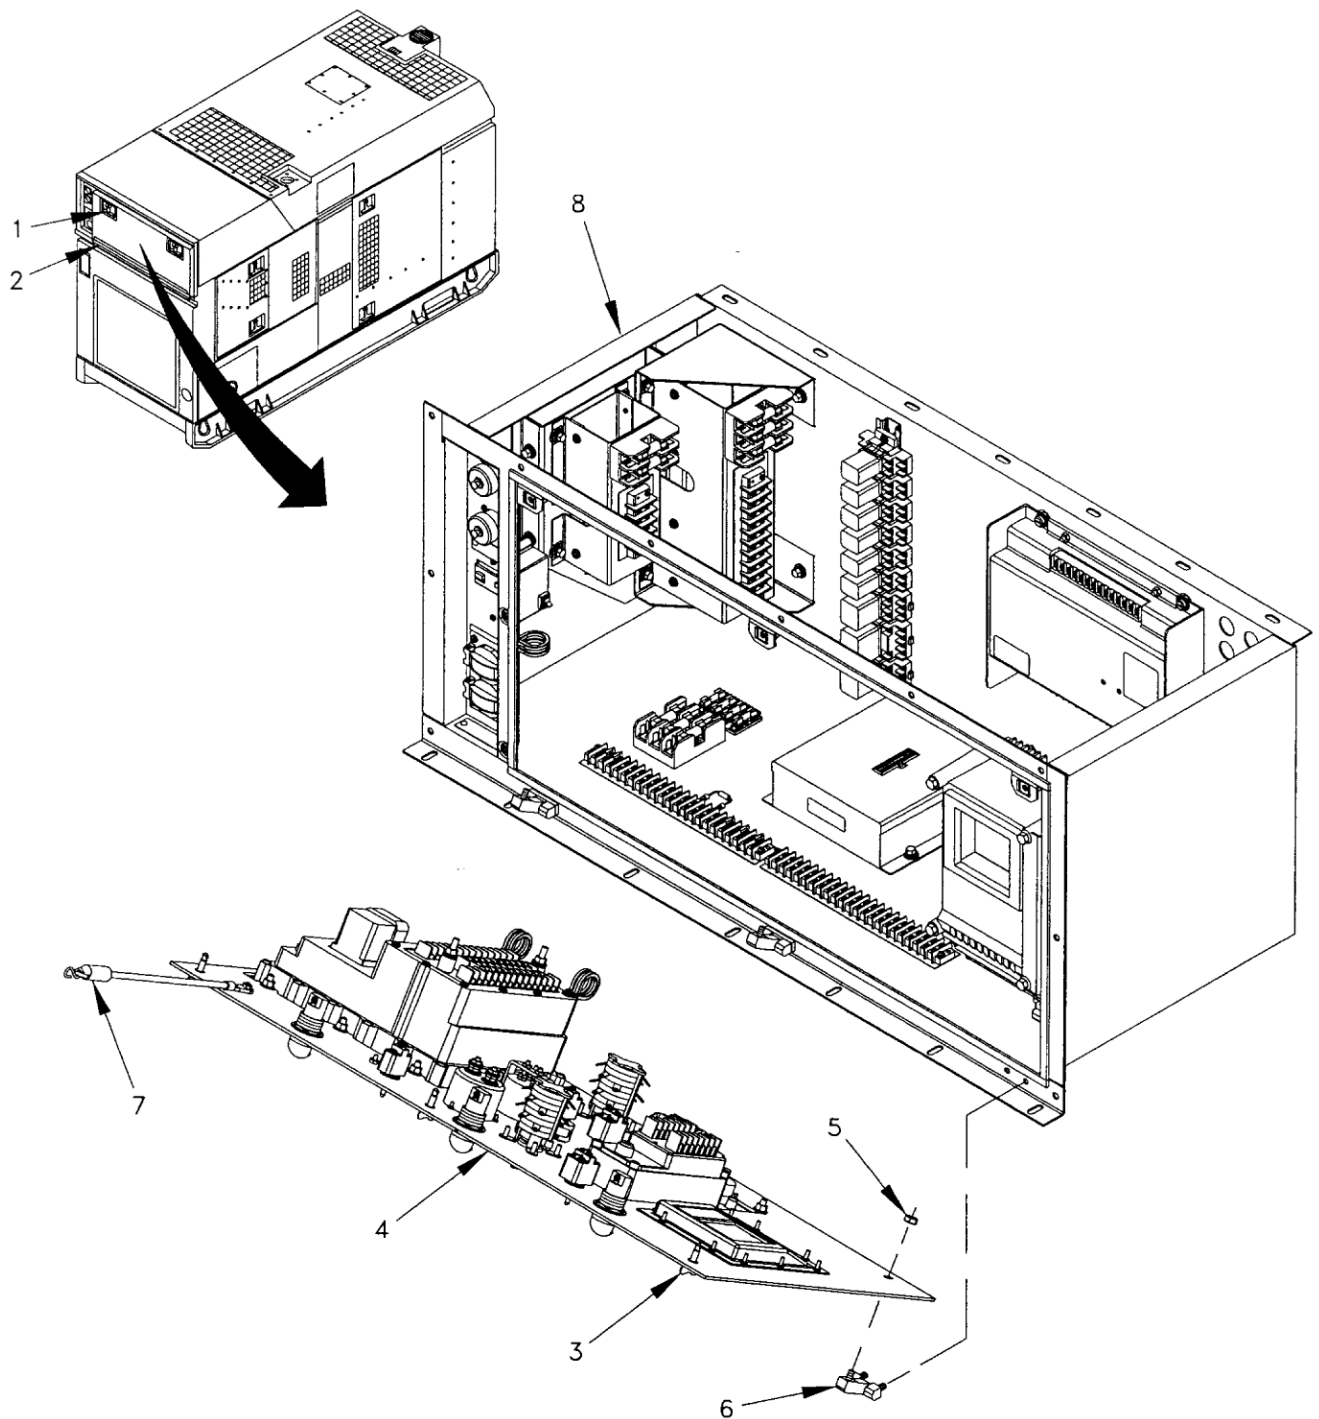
Control Box Panel Assembly (Sheet 1 of 4).
